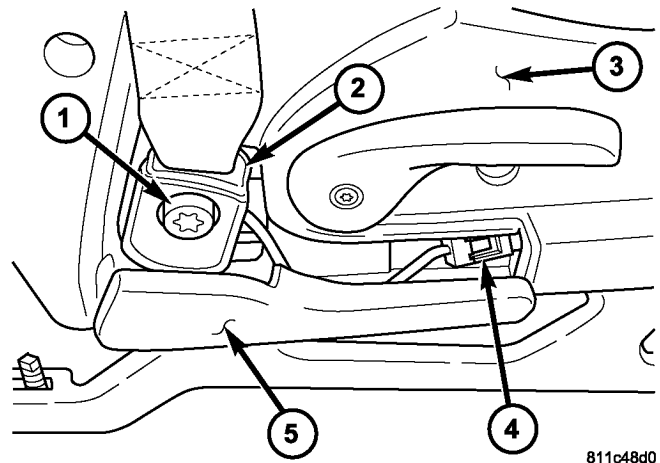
Front Seat Belt Lower Anchor Remove/Install
